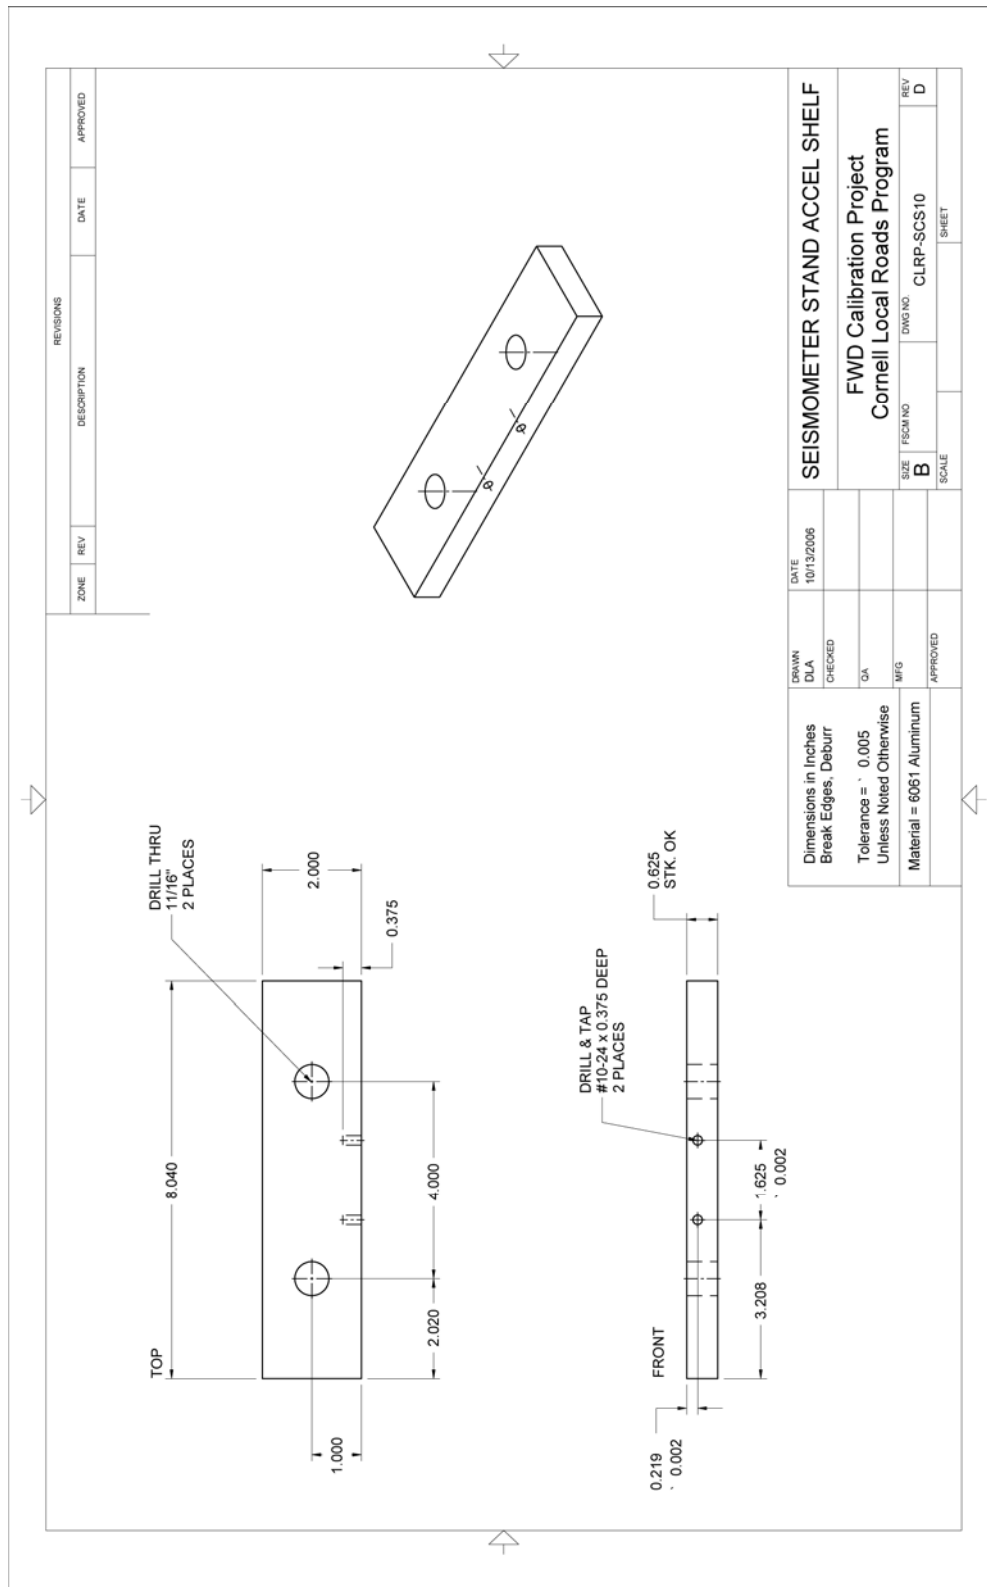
Drawing. CLRP-SCS10 Seismometer Stand Accelerometer Shelf.
